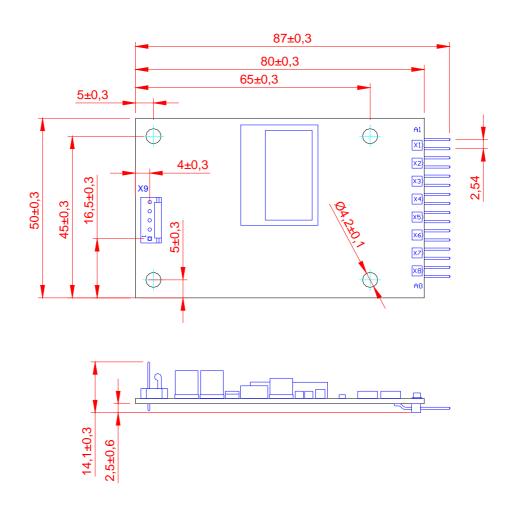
Dimension of the Readermodul ID ISC.M02.M8
